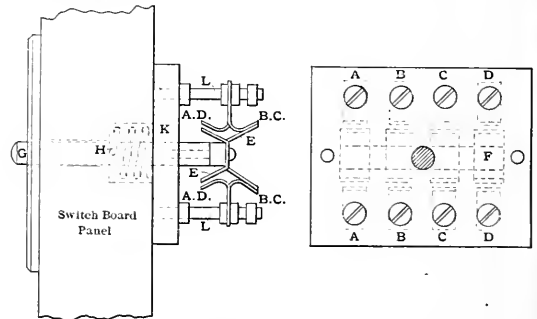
SECTION ELEVATION AND BASE PLATE.
